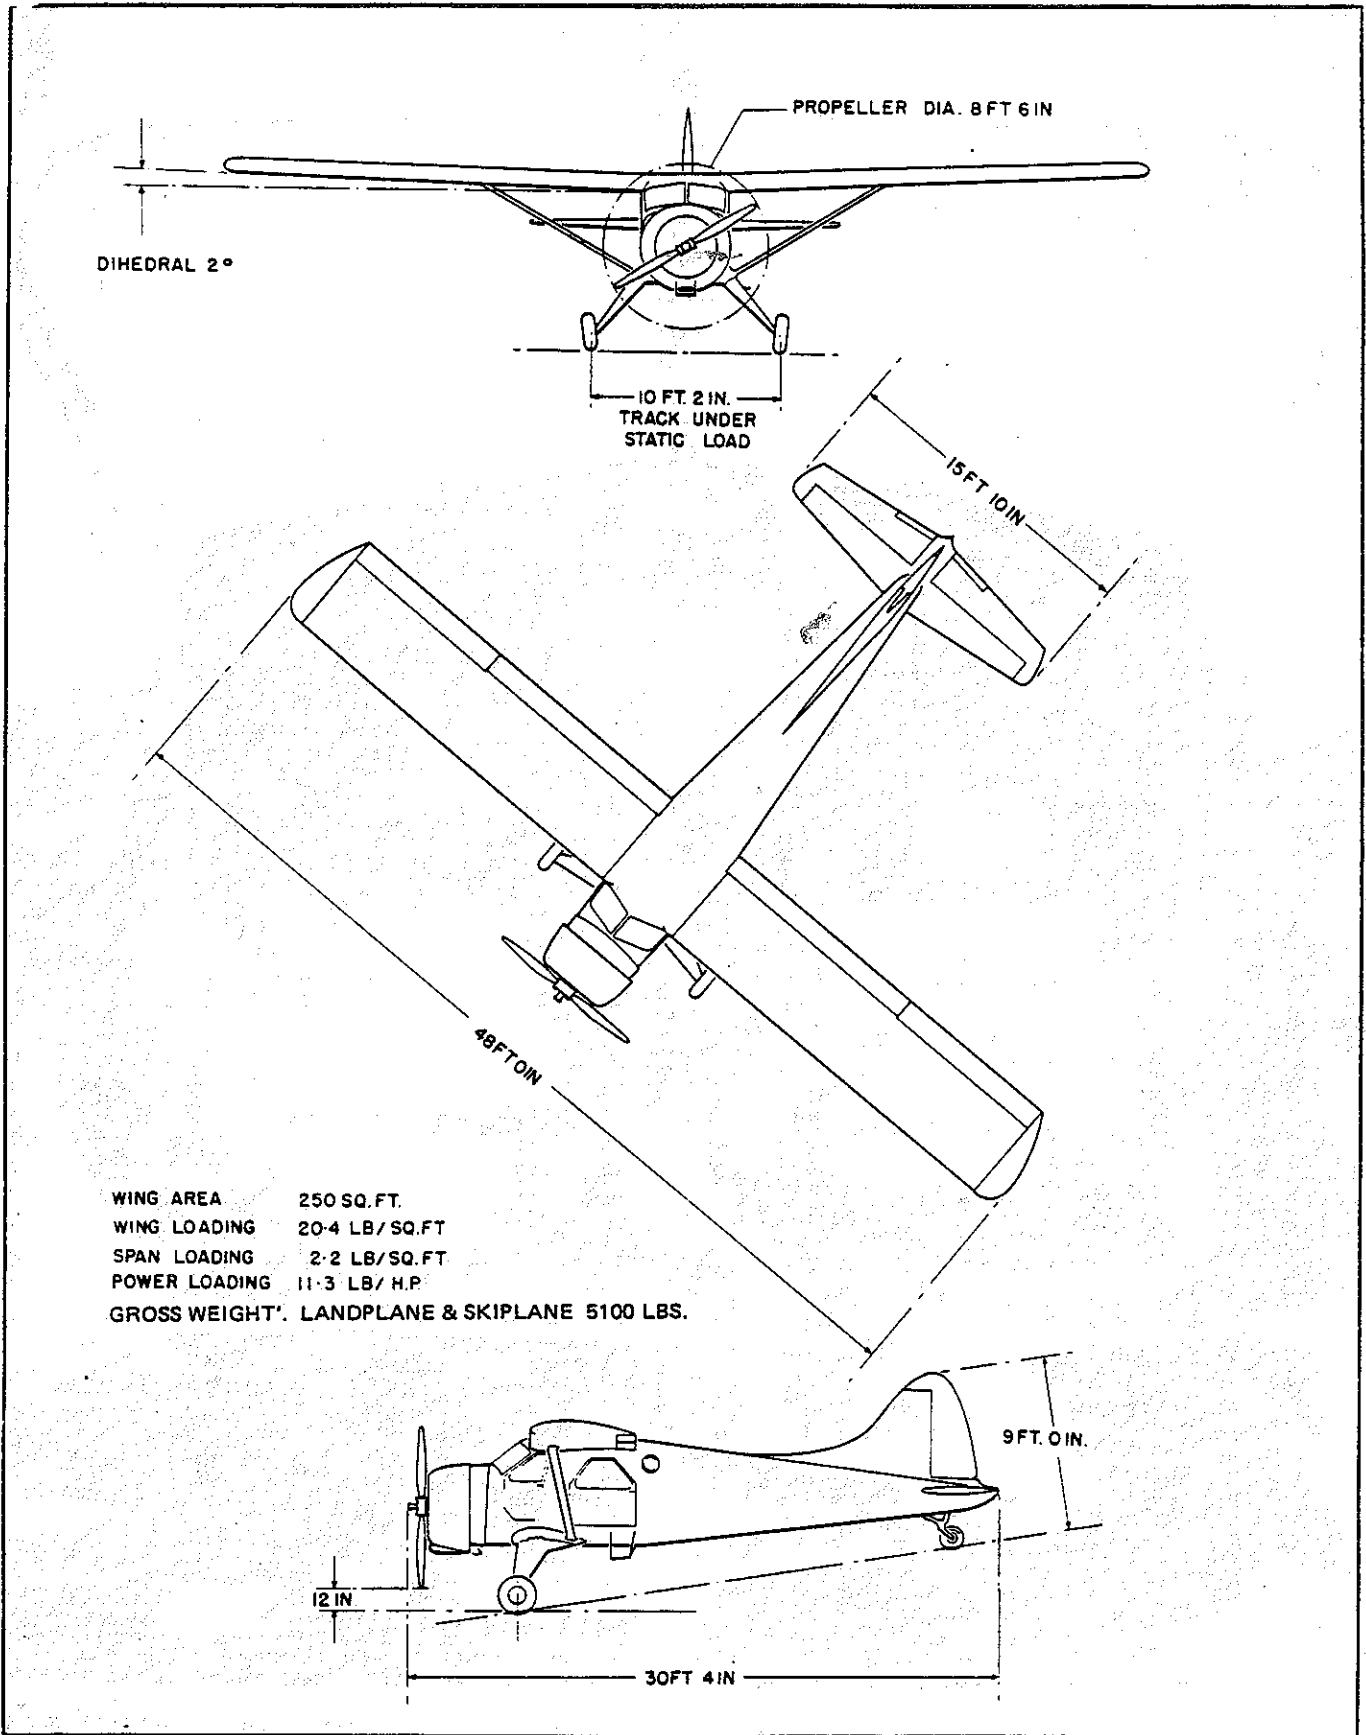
THREE VIEW DIMENSIONAL DIAGRAM - LANDPLANE
